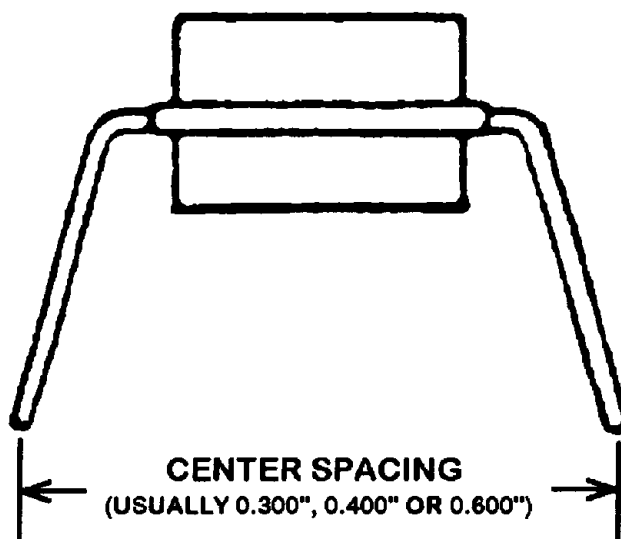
SIDE VIEW OF A DIP COMPONENT
